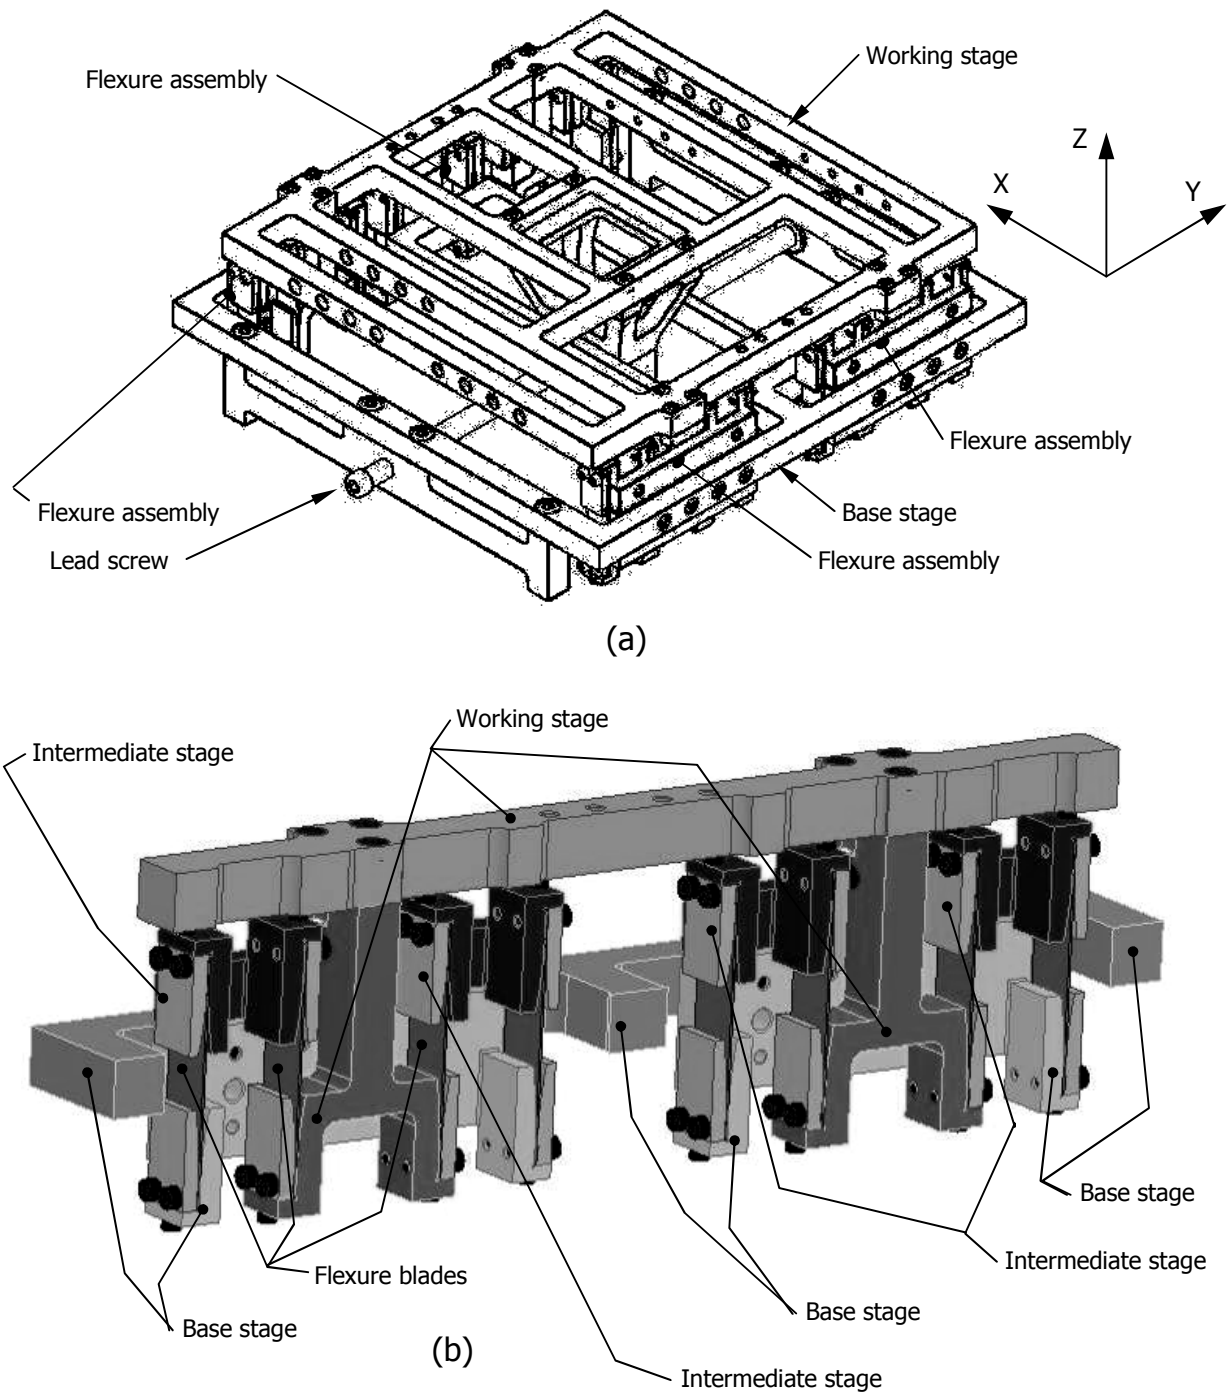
Final test design – (a) complete structure, (b) Section through complete structure showing two flexure assemblies in situ
